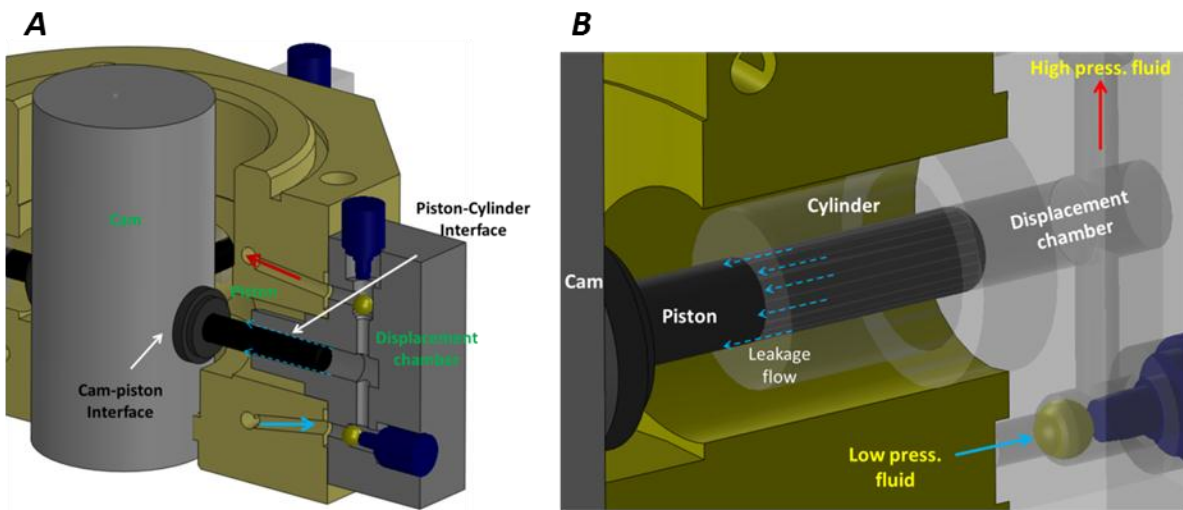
(A) Lubricating gaps in a rotating cam type radial piston pump. (B) Detailed view of piston-cylinder interface
